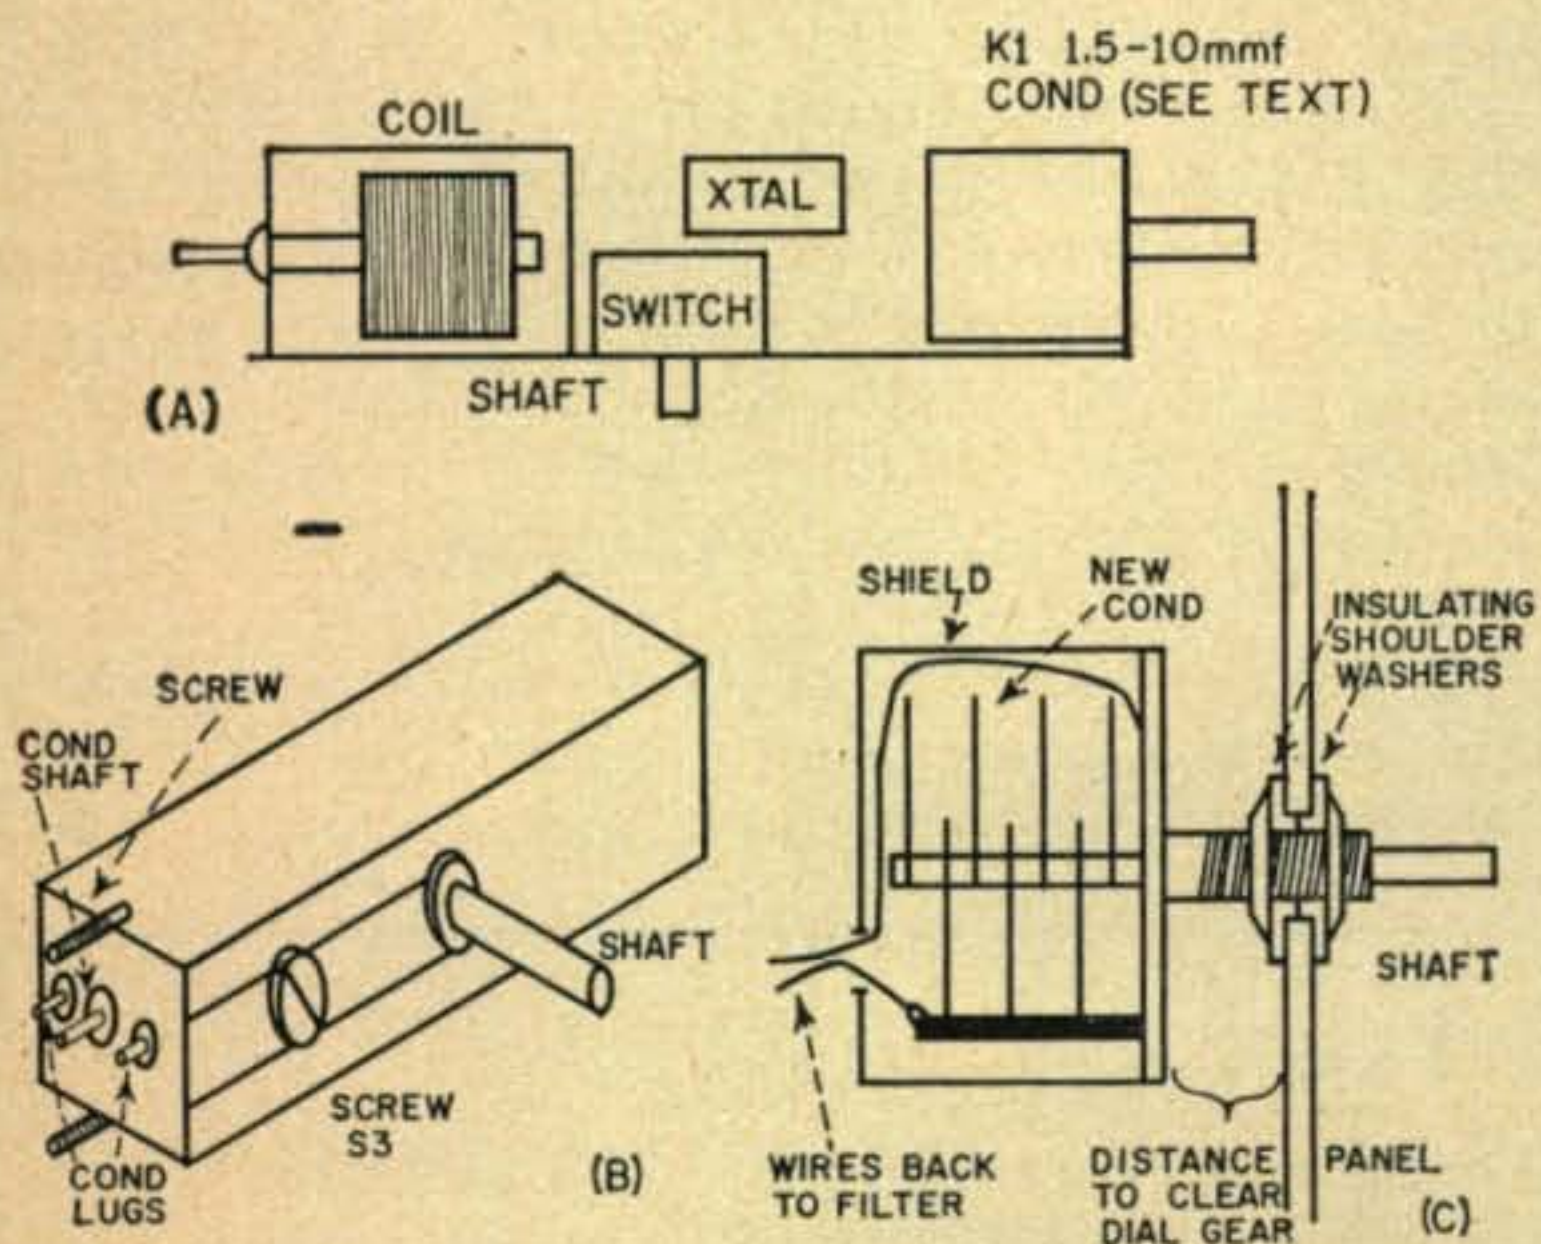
Modification of the crystal filter to provide an external phasing control. View A—Crystal Filter removed from shield can. View B—Crystal Filter can be removed from the 348. View C—Details for mounting the phasing control on the front panel. Note use of shoulder washers.
